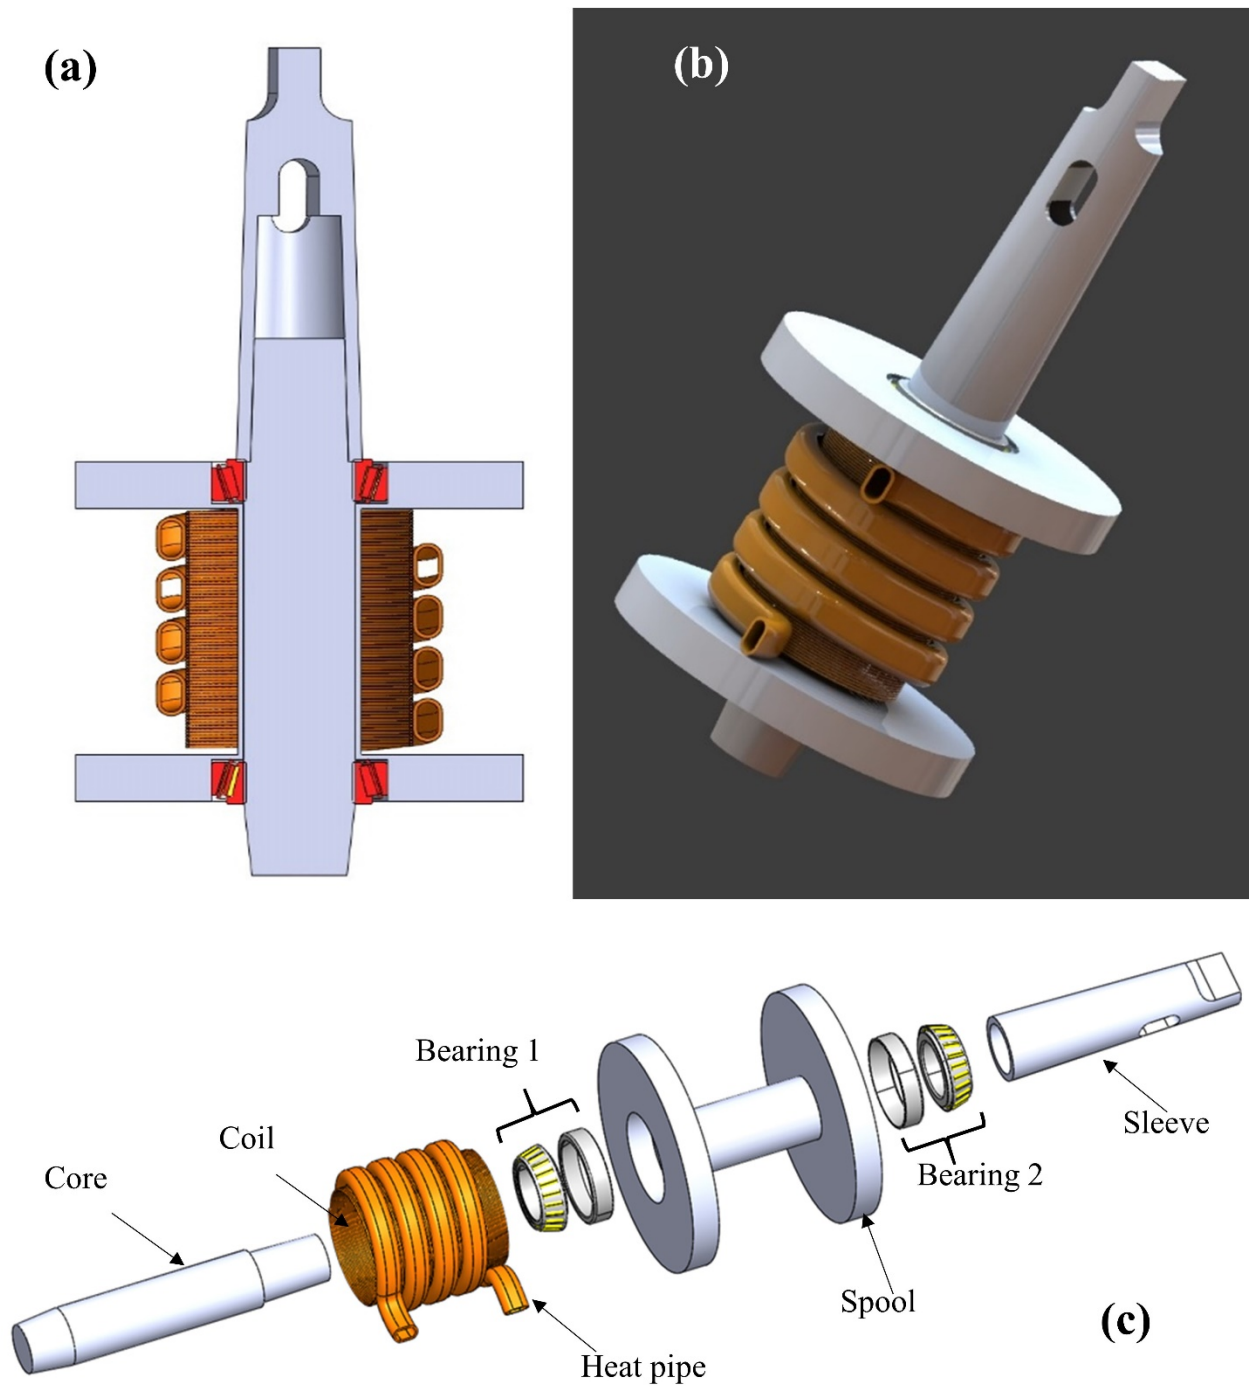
Proposed electromagnet CAD model (a) cross sectional view (b) Full rendered view (c) Electromagnet CAD model exploded view
